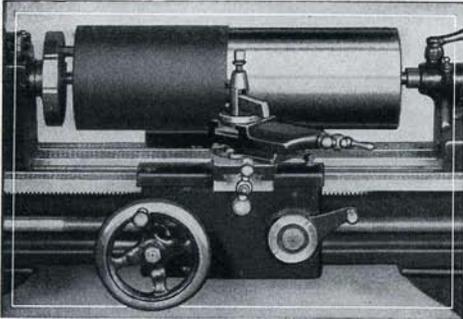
Machining a Steel Roll $6\frac{3}{8}$ Inches in Diameter and 18 Inches Long
